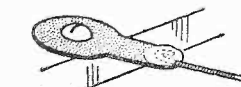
An alternative method of connecting a wire to a soldering tag.
